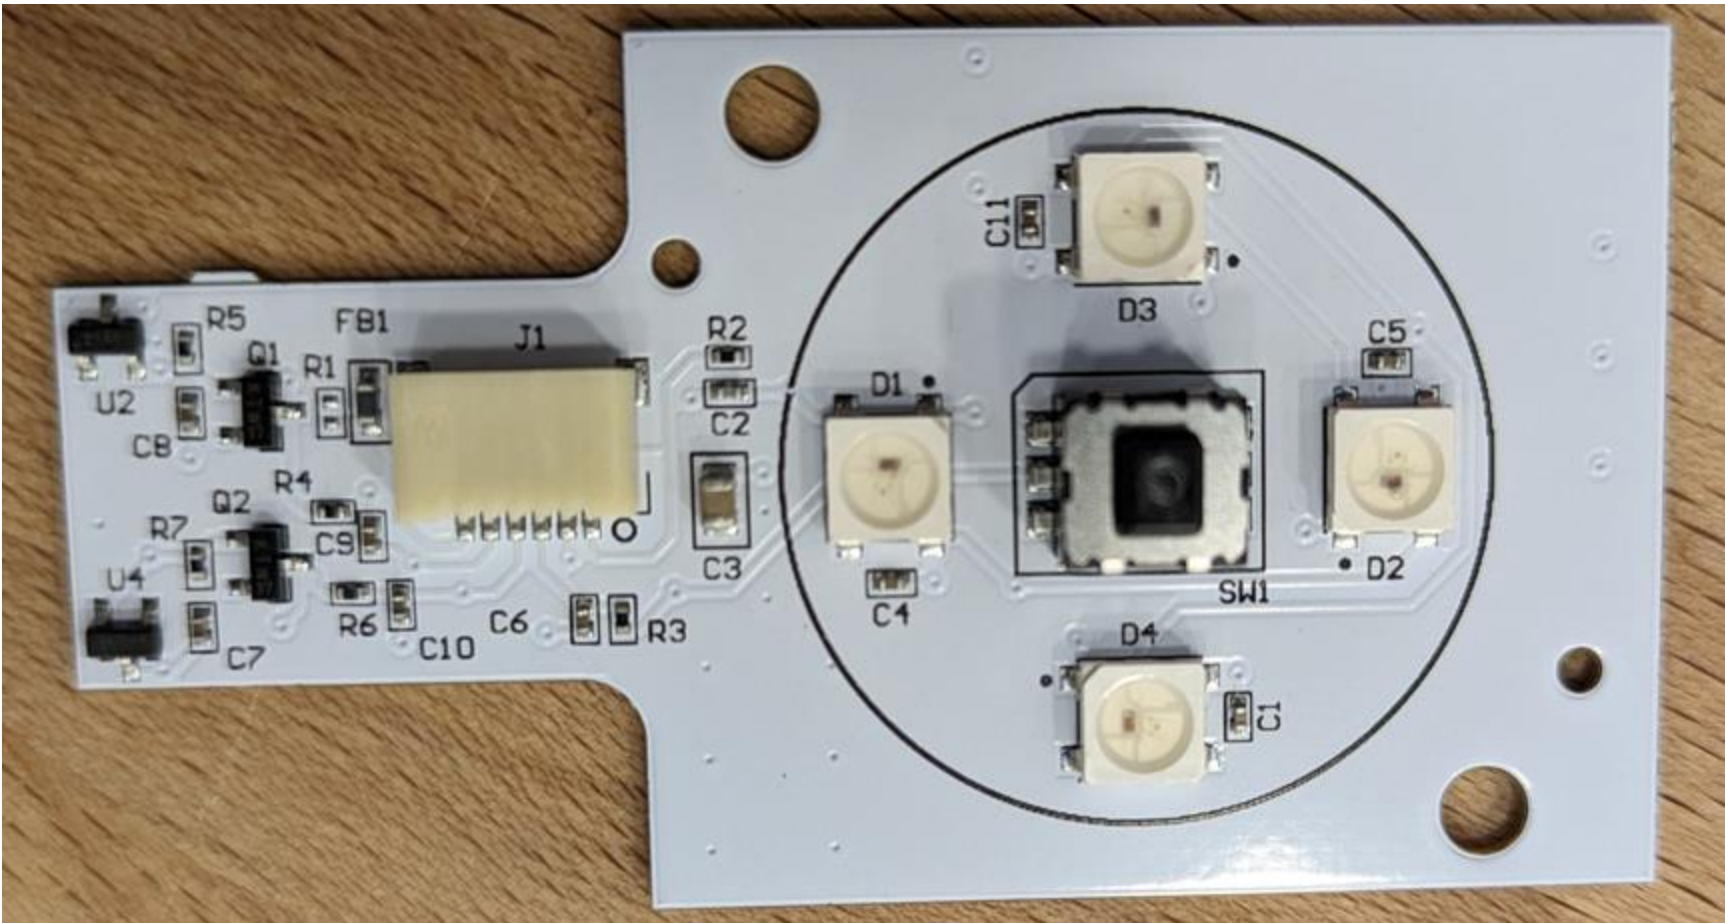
GF-PCA-00154-Lid PCBA- Top Side
